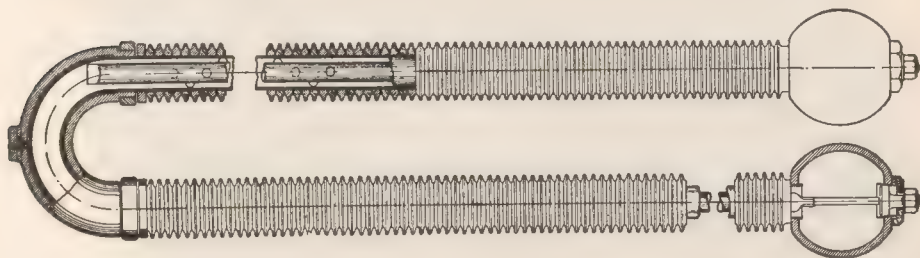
Cross Sectional View of Return Bend Element and Connecting Headers Used in the Construction of Foster Superheaters.
